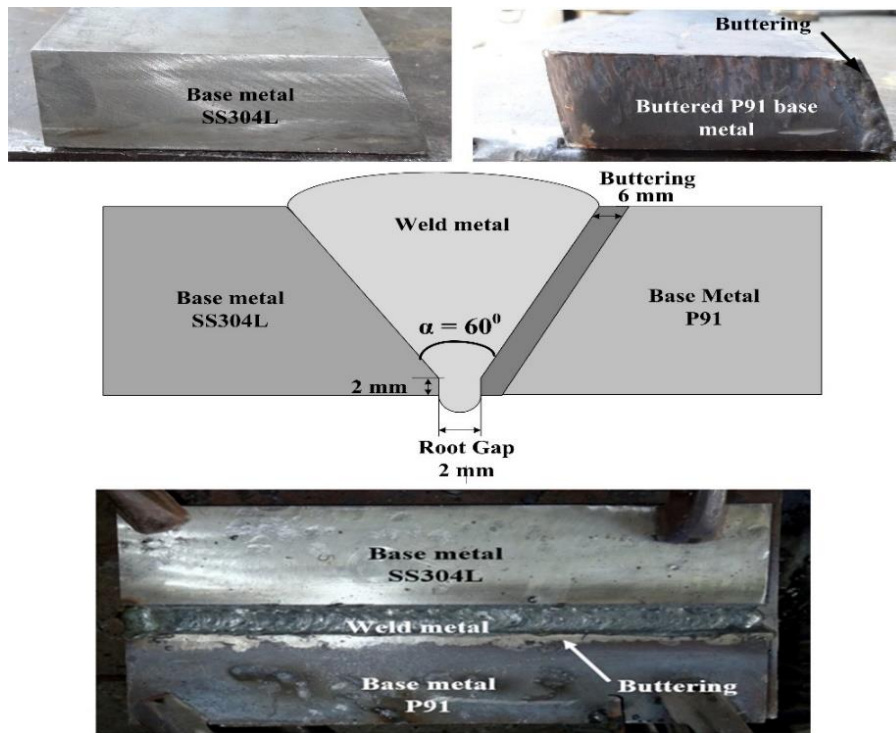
Base material plates and weld geometry of P91/SS304L dissimilar weld
